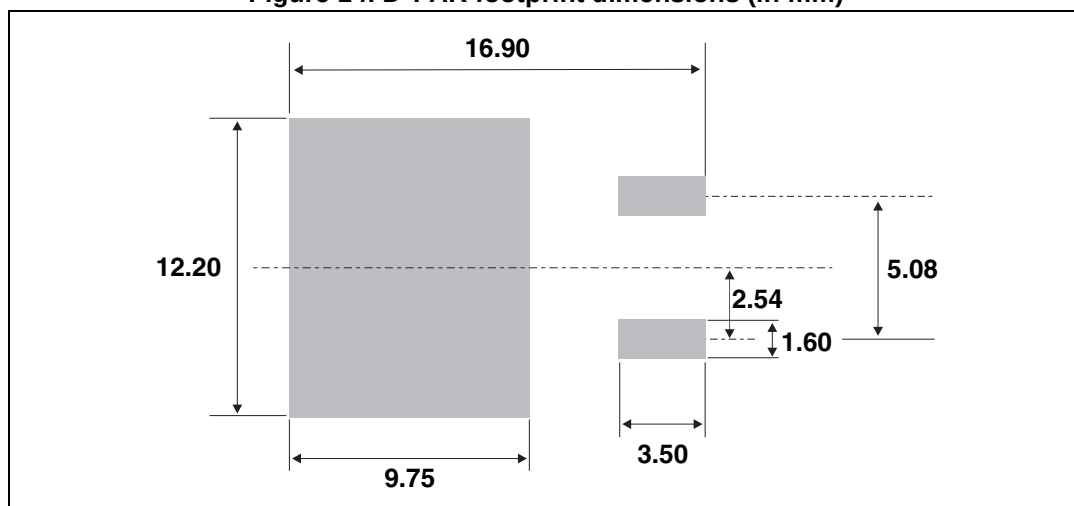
D<sup>2</sup>PAK footprint dimensions (in mm)
